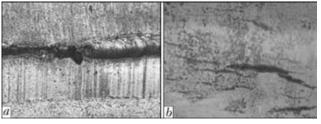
Kinds of defects: a - joining defects in the weld root (pipe D = 1000 mm, s = 16 mm); b - crack-like defect of 1.5-4.0 mm length (pipe D = 10000 mm, s = 14 mm)
